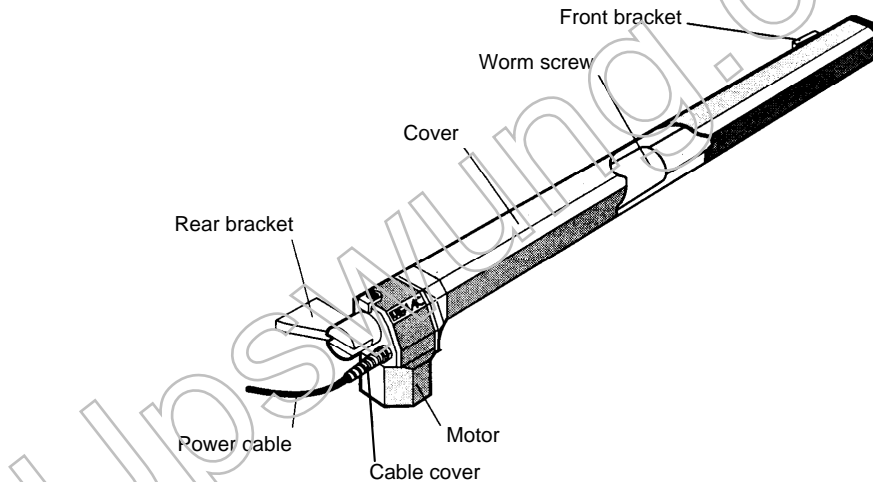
Parts of the 412 Compact Operator (SX model is shown)
